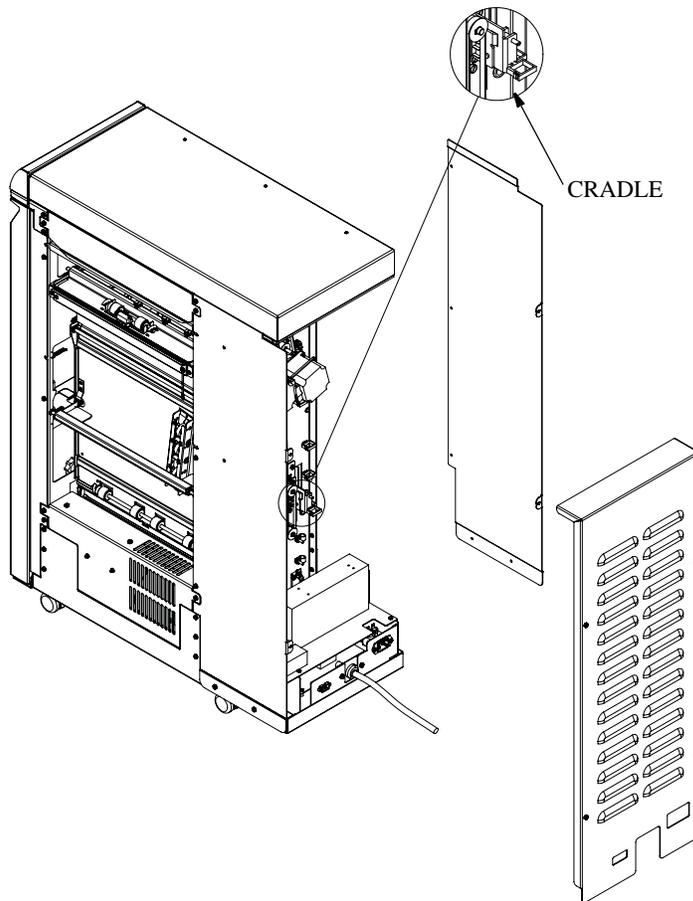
Removing Back Cover to Access the Die Set Position Cradle.
